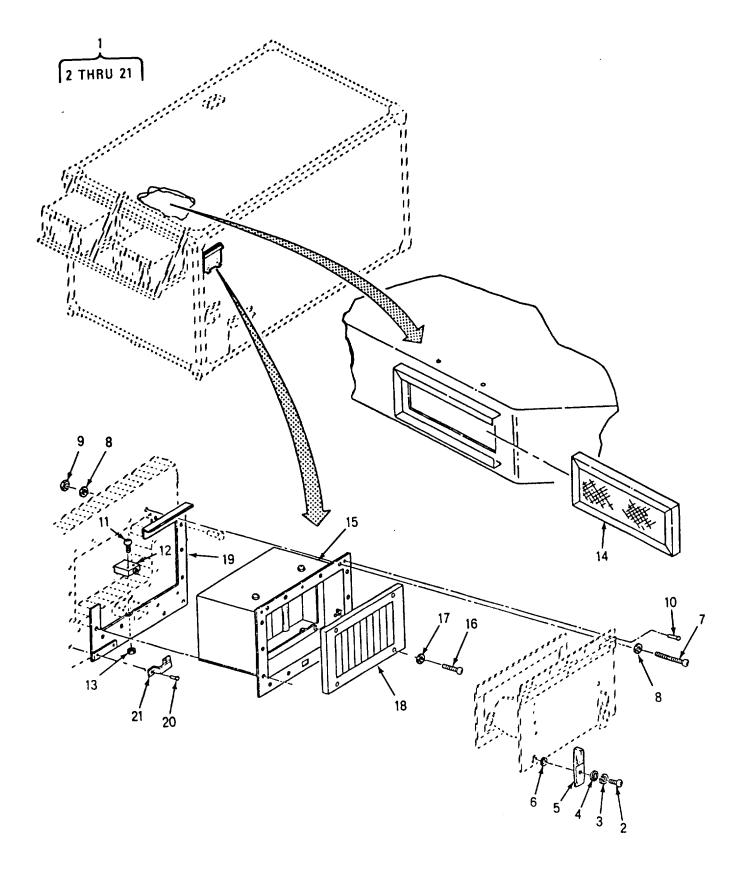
Purge System Port Doors and Limit Switches, Left Hand (Sheet 1 of 2)
